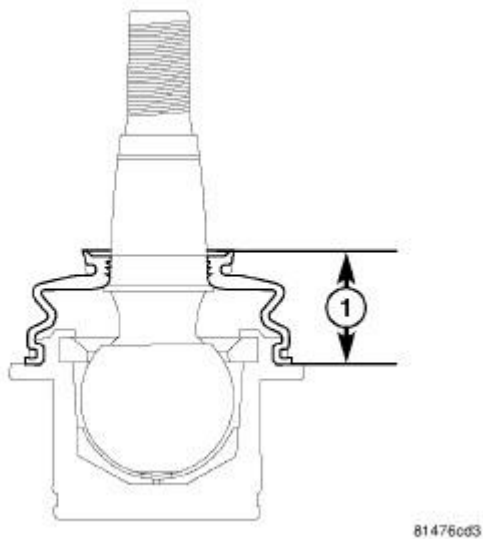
BALL JOINT SEAL BOOT HEIGHT
